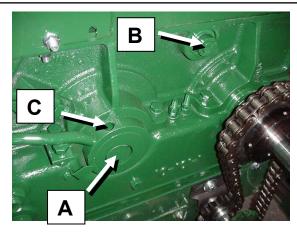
A - Rollermill Bearings, B - Agitator Shaft Bearings, C - Eccentric Housing
